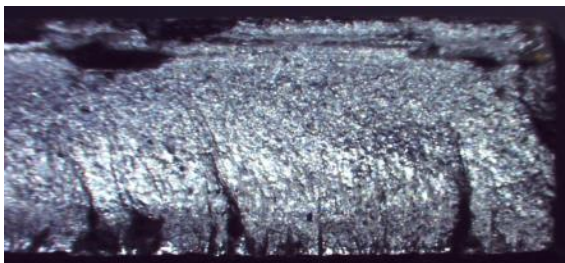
Failure Positions of Offset Tool Friction Stir Welded Samples – 130 MPa Stress Amplitude
